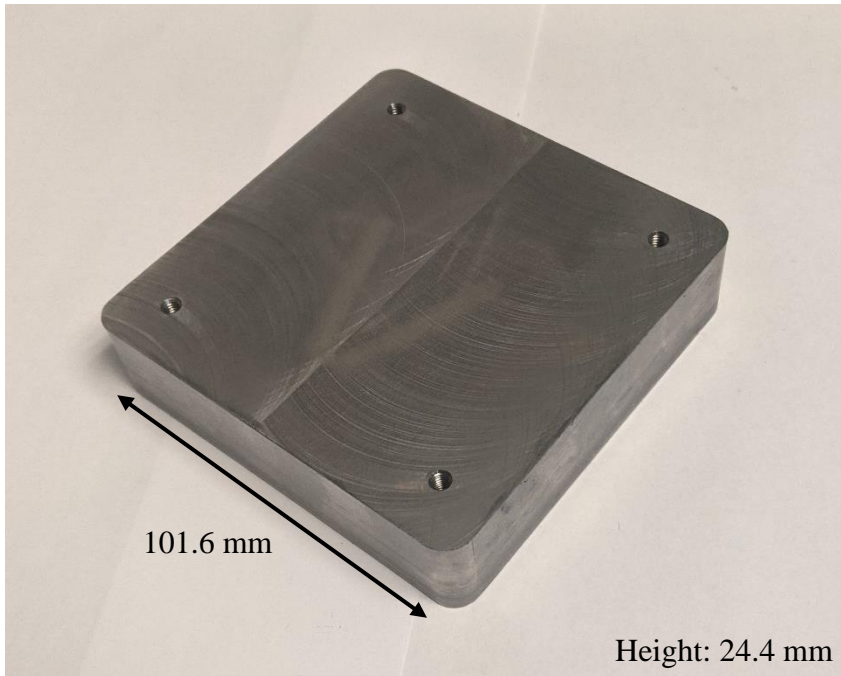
Machined half-feed combine harvester small bottom blade forging punch base
